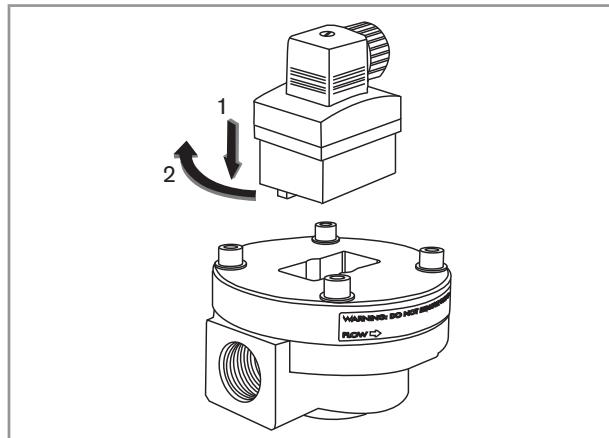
Mounting of the SE30 Ex onto an S070 fitting
